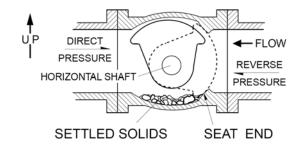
HORIZONTAL PIPE WITH SOLIDS
